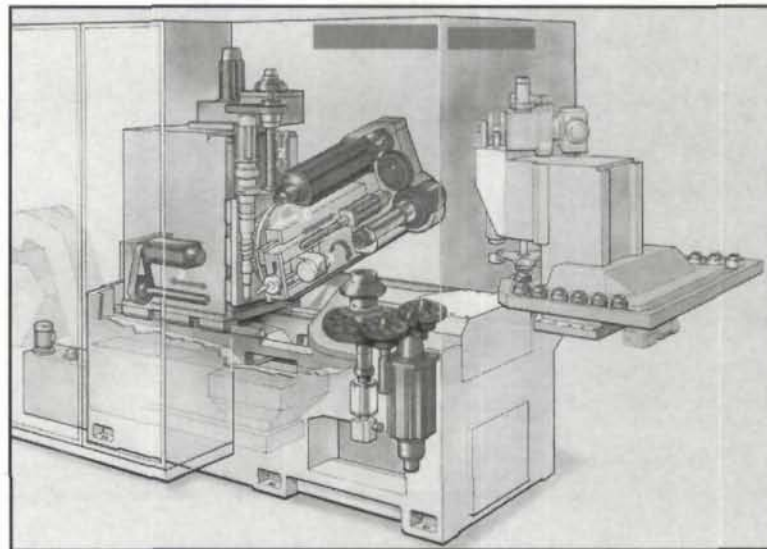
Concept Hobbing Machine for High-Speed Machining.
